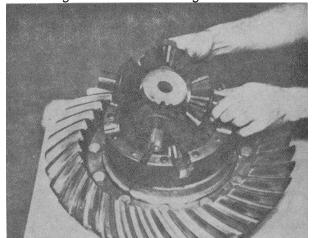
C-45. Removing Spider Assembly 14. This procedure is used to remove ring gear, when only ring gear and pinion are to be replaced, Figure 9C-46.
